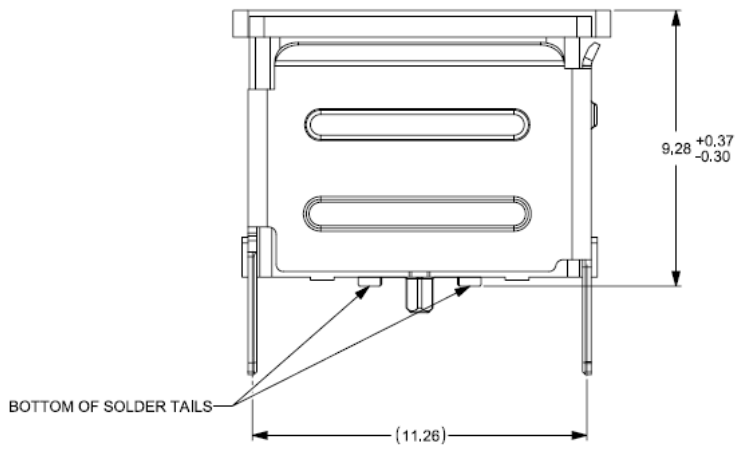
Profile View of Fixed-Side Connector with Dust Cover
